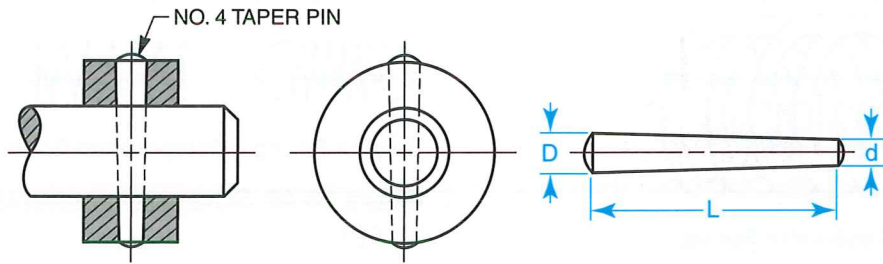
Conventional method for representing pin fasteners on drawings.
